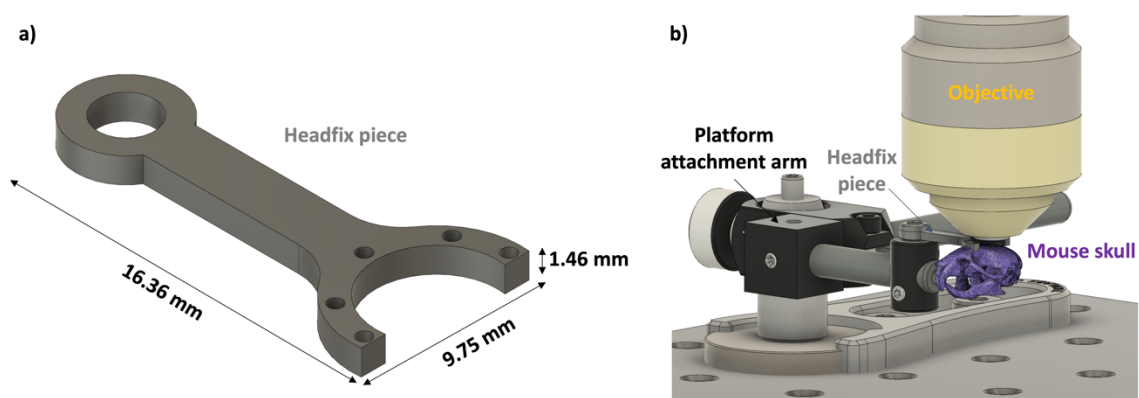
Head-fix piece. a) Dimensions of head-fix piece. b) Attachment of head-fix piece to skull and microscope platform.
